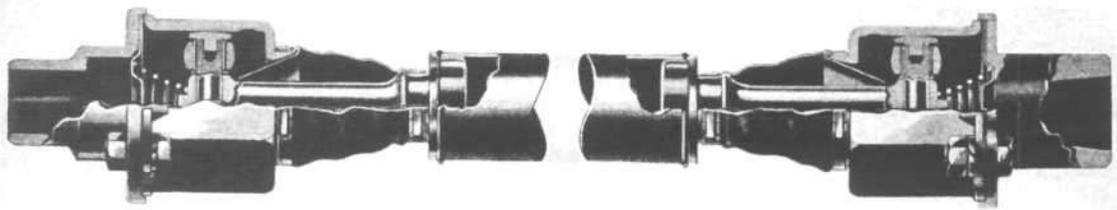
PROPELLER SHAFT AND UNIVERSAL JOINTS—BALL AND TRUNNION TYPE
